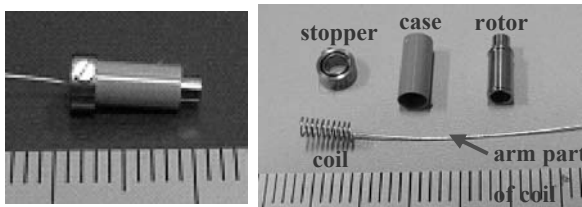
Prototype of ultrasonic micromotor (left:overall view, right:exploded view)
